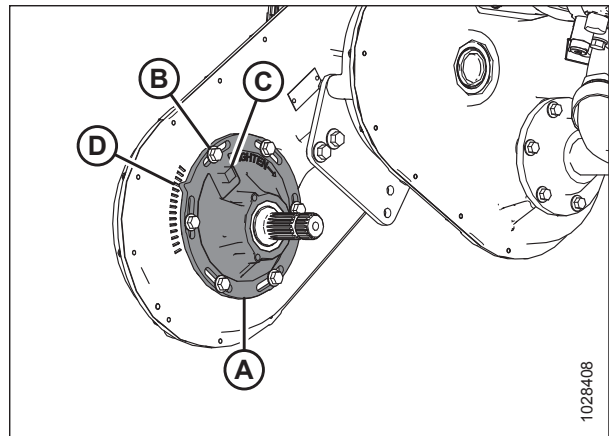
Completion Gearbox Chain Tensioner Cover
